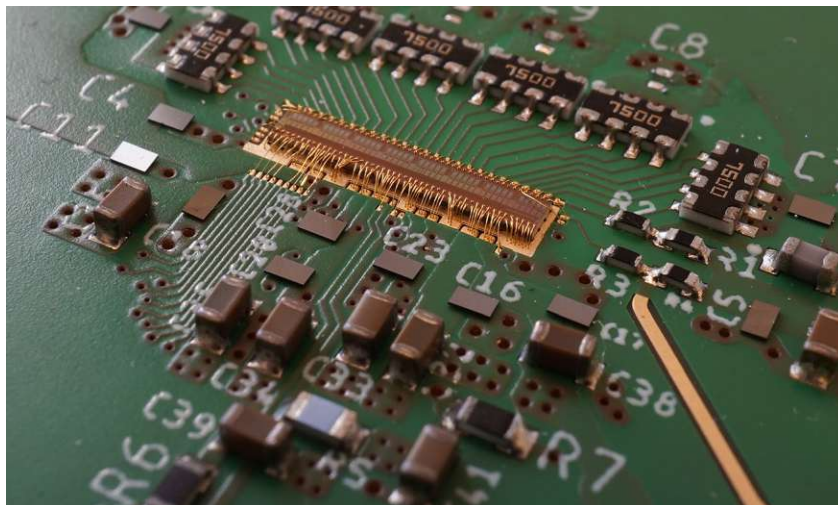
Glued and wire-bonded PWM ASIC on the assembled test-PCB.
